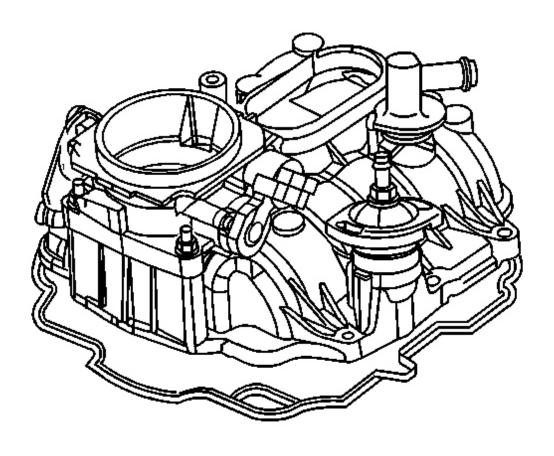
Intake Manifold Upper Gasket Courtesy of GENERAL MOTORS CORP.
